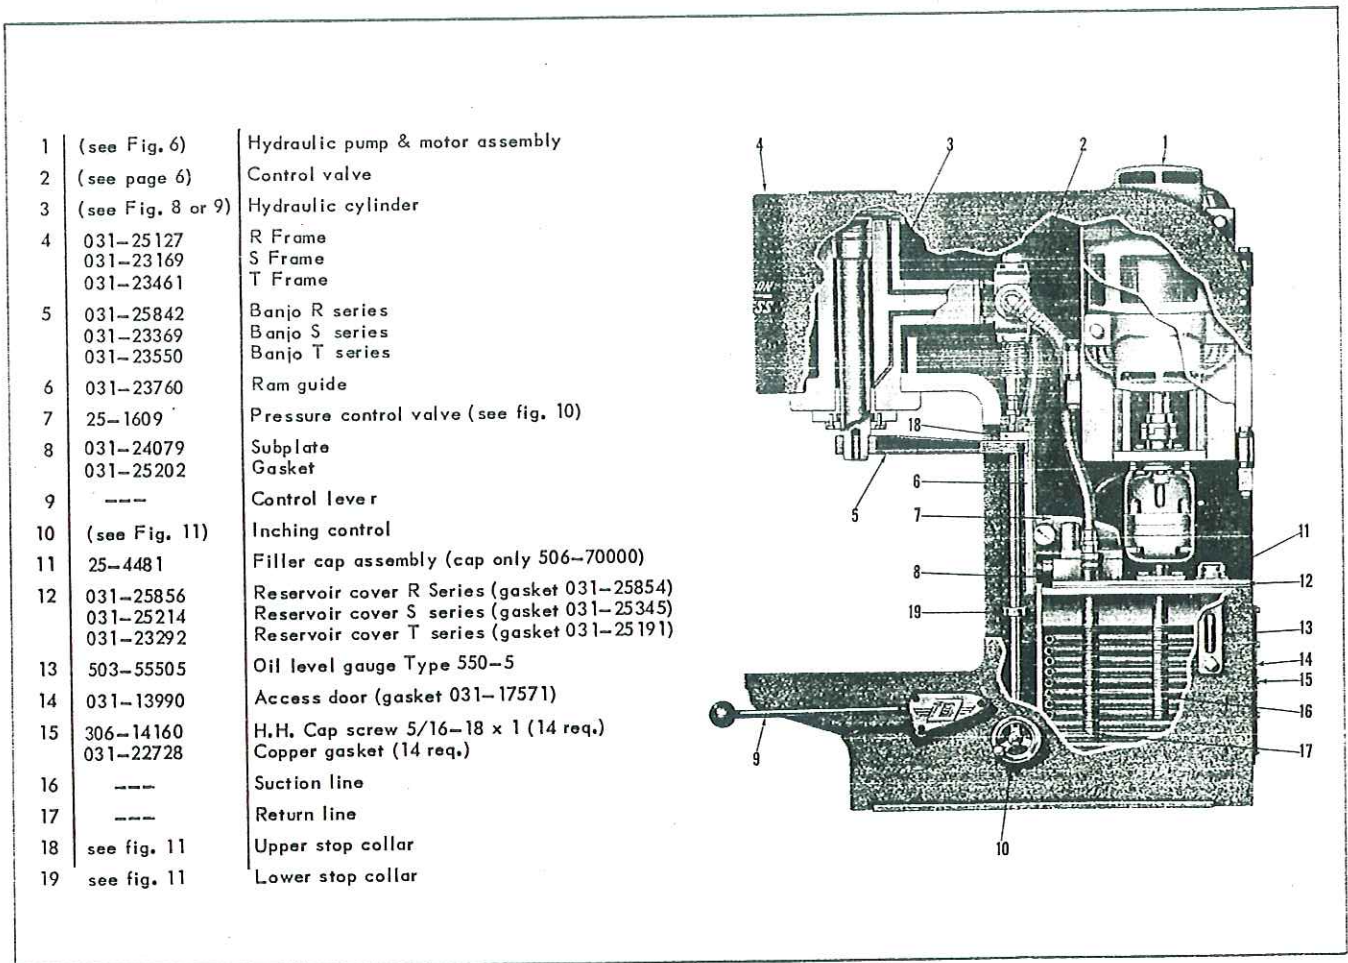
CUT-AWAY VIEW OF THE MULTIPRESS
